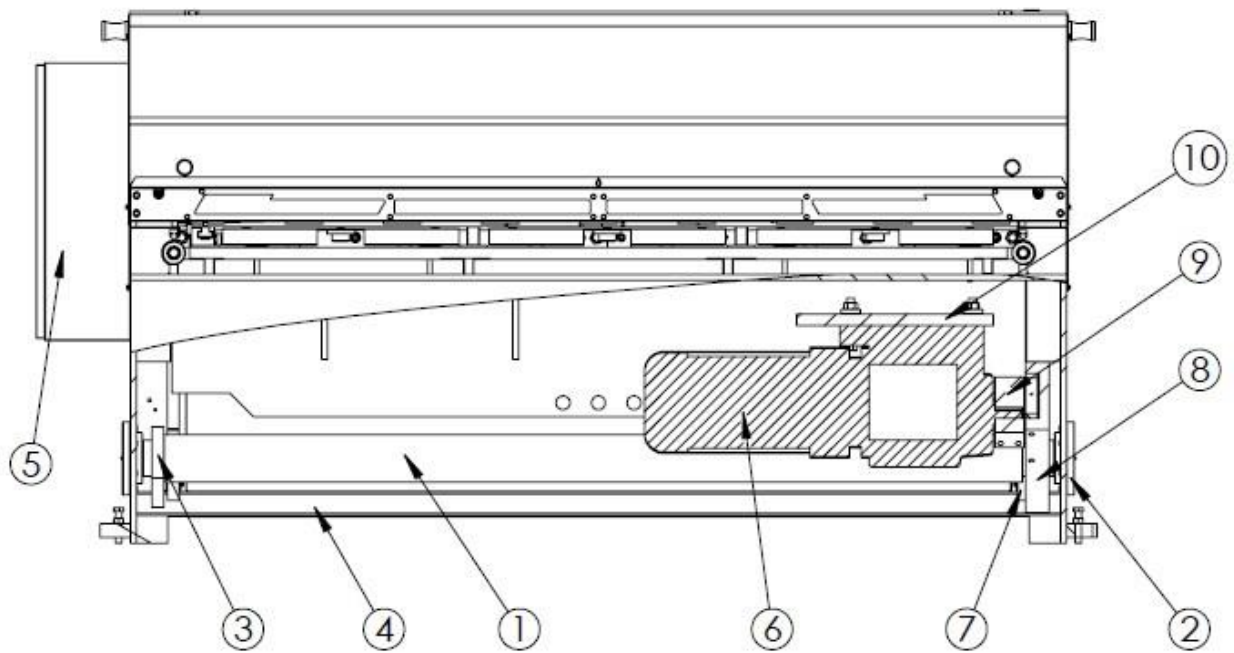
A SERIES Electrical Box, Gear Box and Main Shaft Parts
